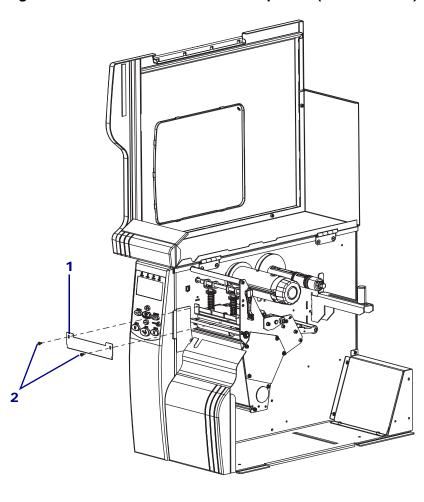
• Remove the Old Ribbon Strip Plate (110Xi4 shown)
